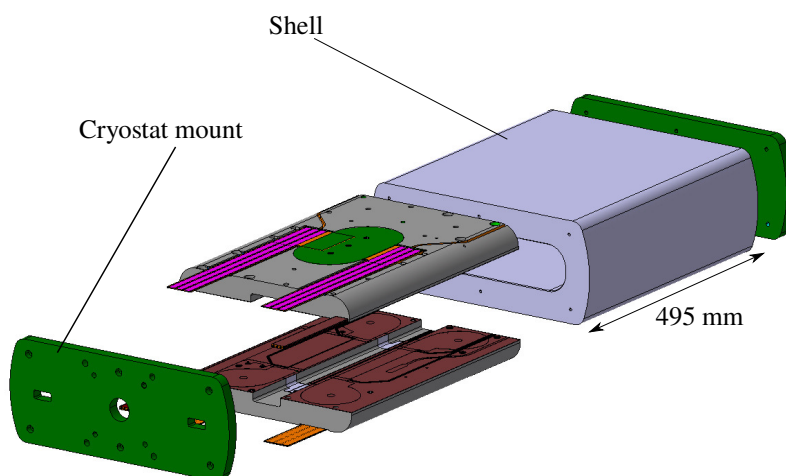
View of the two magnet poles enclosed by a tapered shell, to which the cryostat mount is attached.
